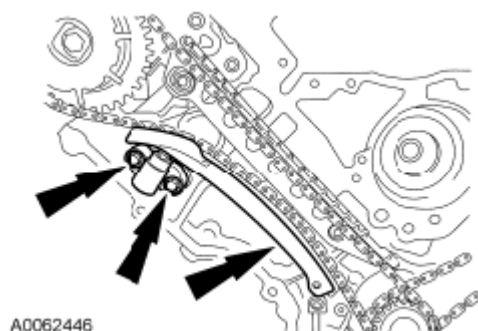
Locating RH Timing Chain Tensioner And Tensioner Arm
